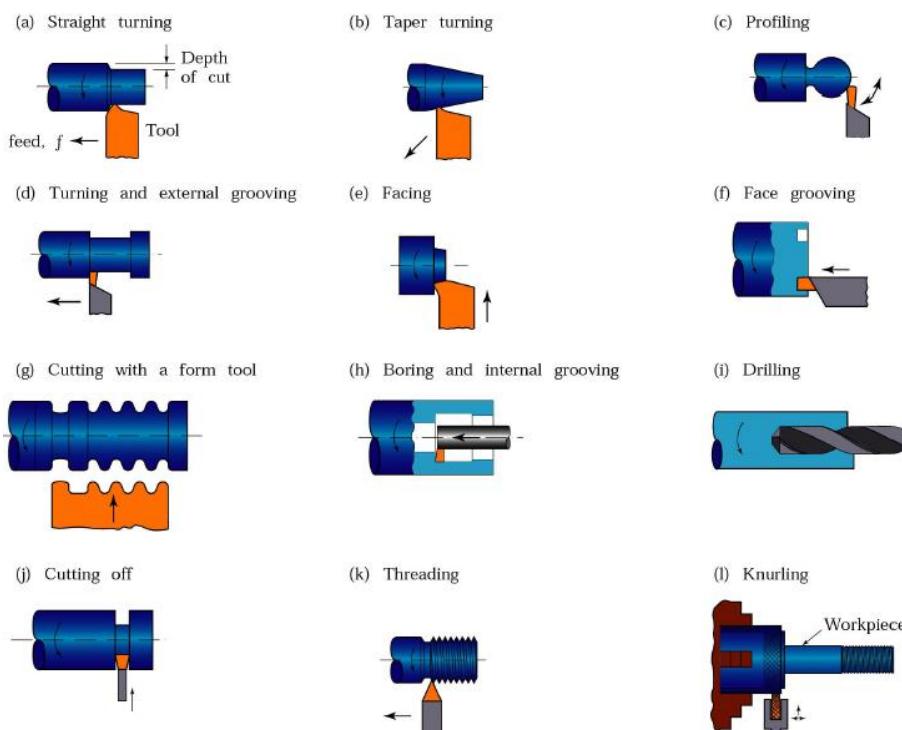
Schematic of some possible machining operations on the lathe machine. Figure source: Kalpakjian and Schmid's book
